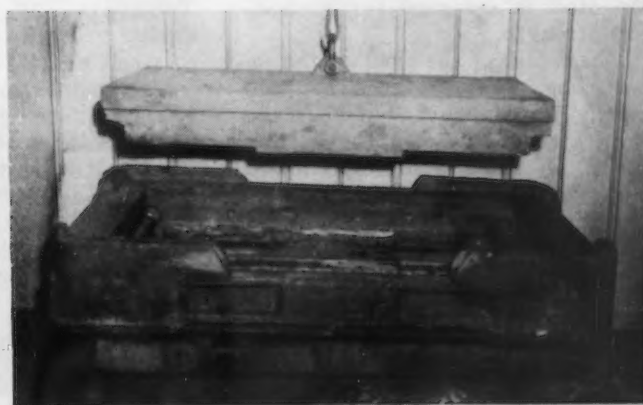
The insert or center section of the stool is of cast iron. This section takes most of the thermal shock set up by the molten metal and is easily removed and replaced.
